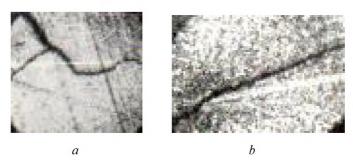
Hot cracks in the welded connected tube of the armature with the bottom: a – the development of a crack with the opening of the banks from the fusion zone to the base metal; b – axial crack (X200)
